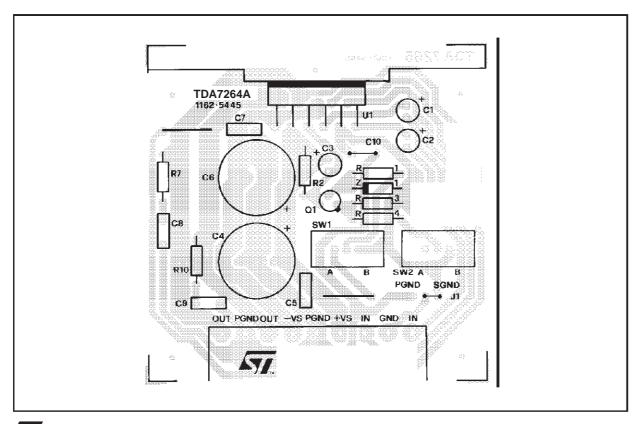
P.C. Board And Component Layout of the Demo Board Schematic TDA7264A (1:1 Scale)
